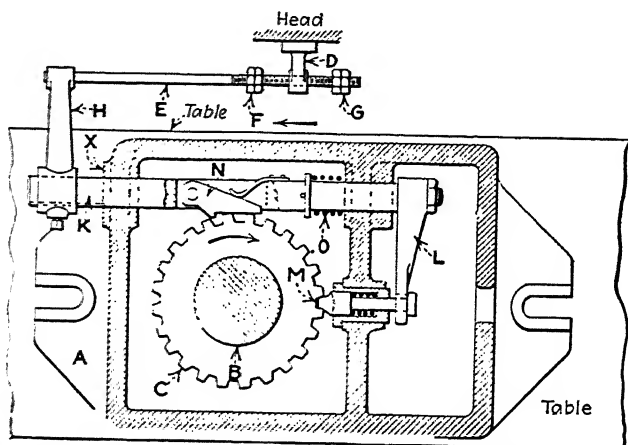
Semi-Automatic Indexing Device for Hand Milling Machine
